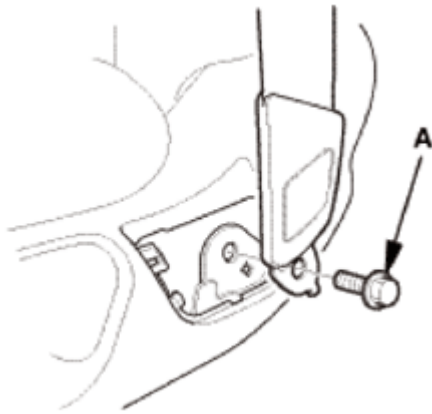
Identifying Front Seat Belt Lower Anchor Bolt
